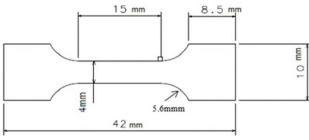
Dimensions of the tensile test samples شكل 3 ابعاد نمونه براى تست كشش [13].
